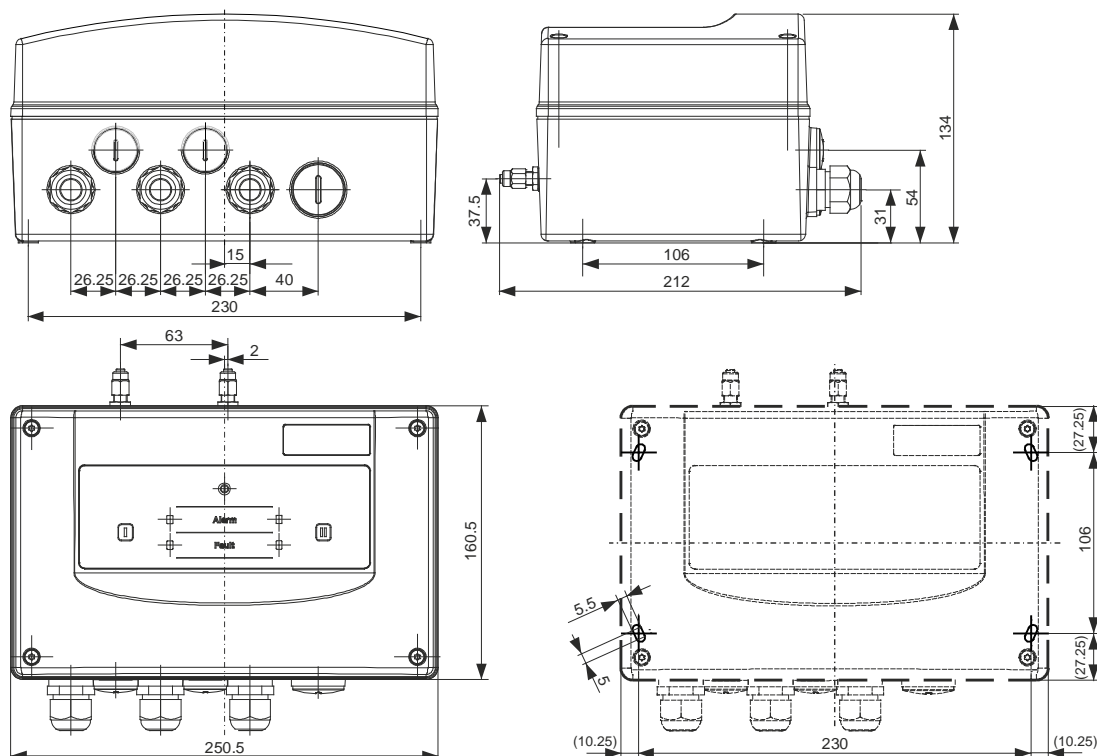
Dimensioned drawing, drilling plan for evaluation unit
